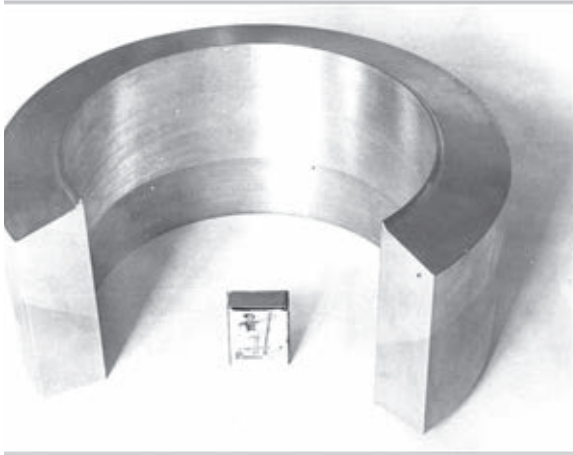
Transition element (diameter 350 ? 50 mm) for welding steel pipe with a pipe 12HMF steel 10H18N10T made WUAs under pressure.
